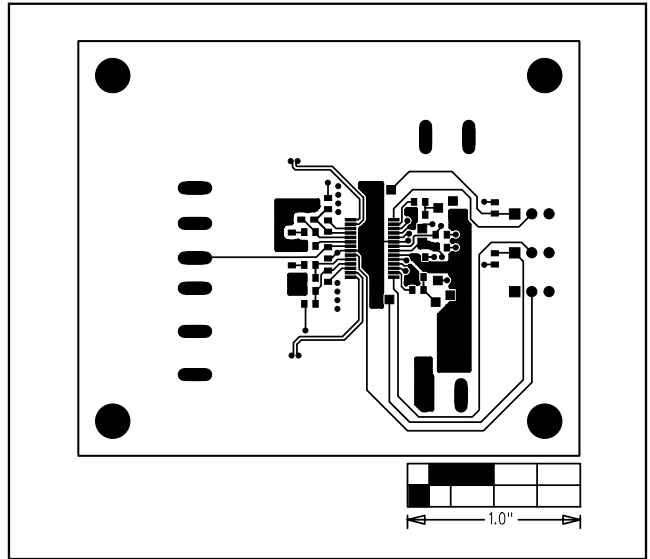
MAX5066 EV Kit PC Board Layout—Component Side
